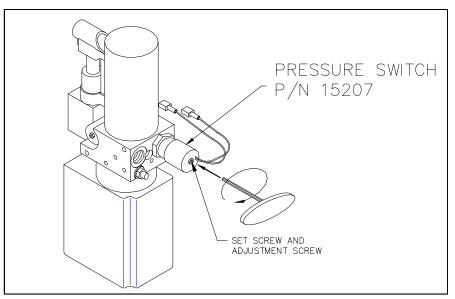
HYDRAULIC PUMP WITH PRESSURE SWITCH
